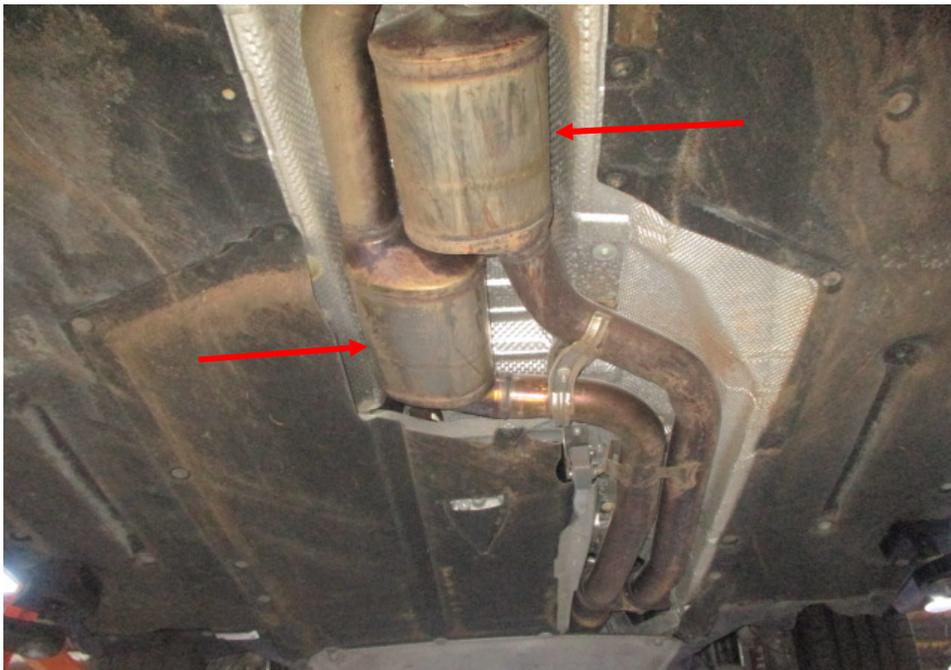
shows the front section of the Motor Car's exhaust system. My examination of the Motor Car's exhaust system revealed no sign(s) or indication(s) of any cut or weld marks along its exhaust pipes, on its rear muffler, on its centre resonator boxes (arrowed) and on its catalytic converters.
